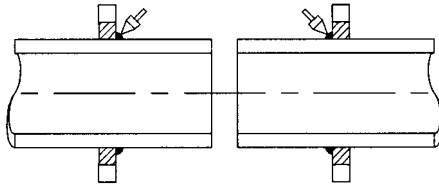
Weld the interstitial supports to the exterior of the primary pipe.
